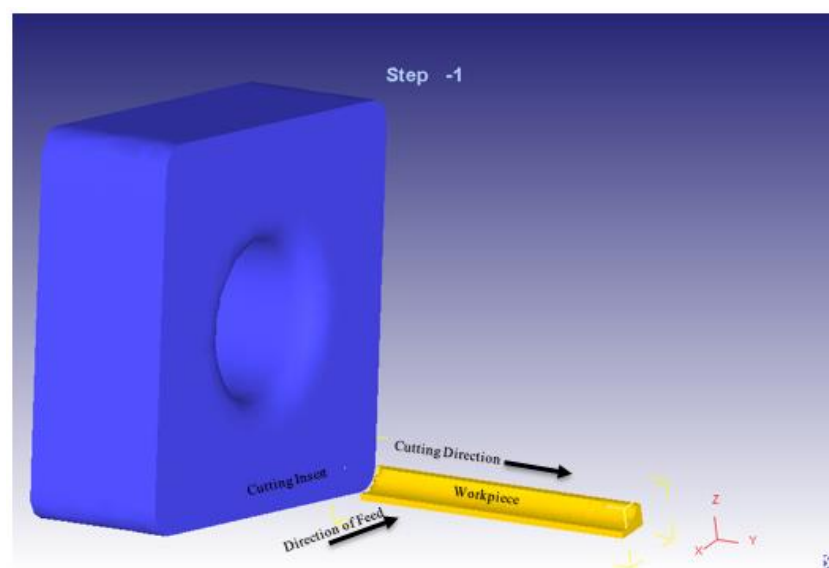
Selected workpiece and cutting insert for mesh generation.
